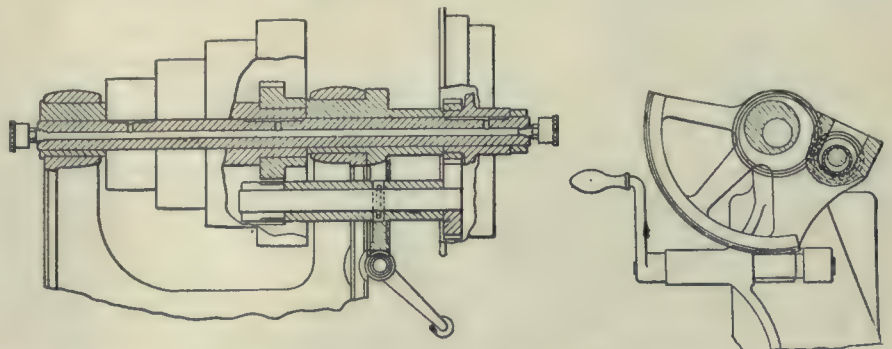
Detail of Drive and Belt Lightener, Garvin No. 14 Milling Machine.
